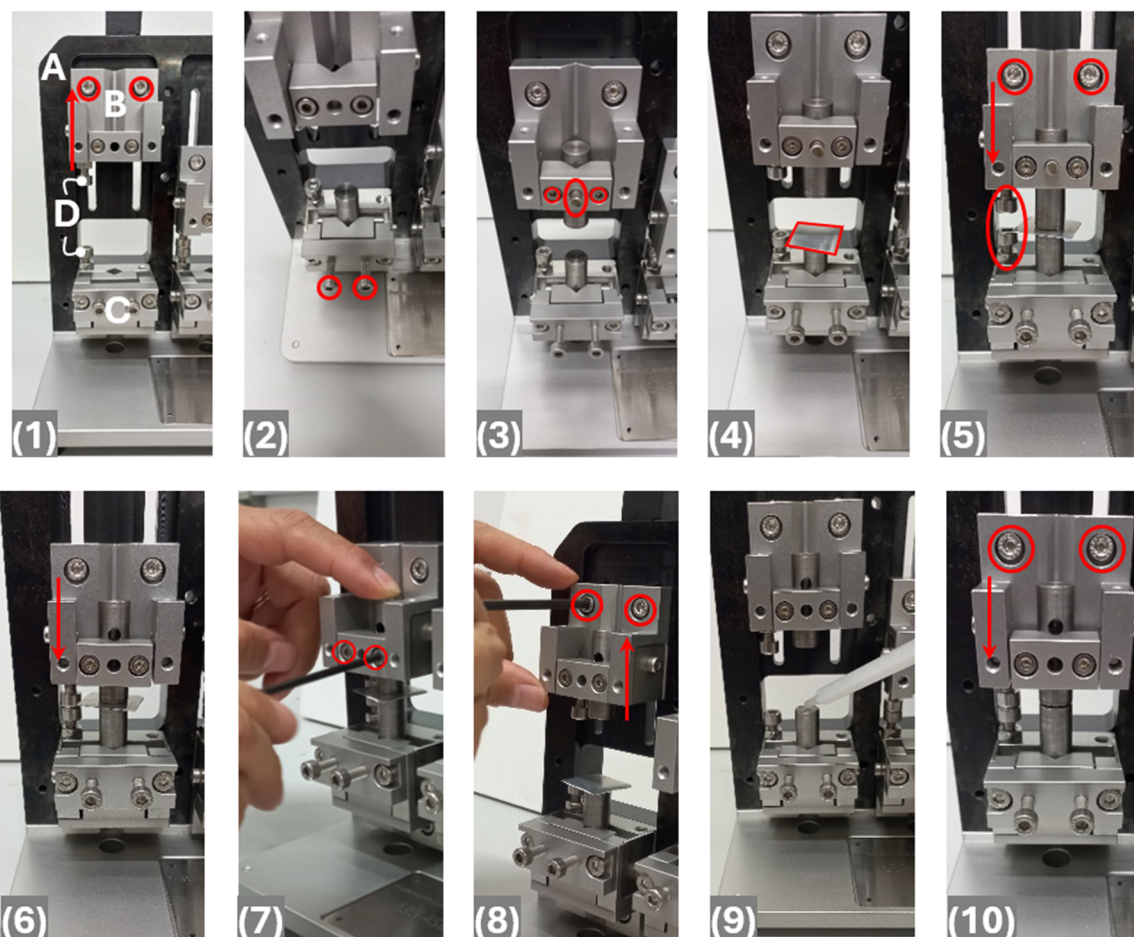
Procedural steps for the manufacture of butt joints using the developed jigs, A: Vertical plate; B: Upper support assembly; C: Lower support assembly; D: Mechanical stops.
